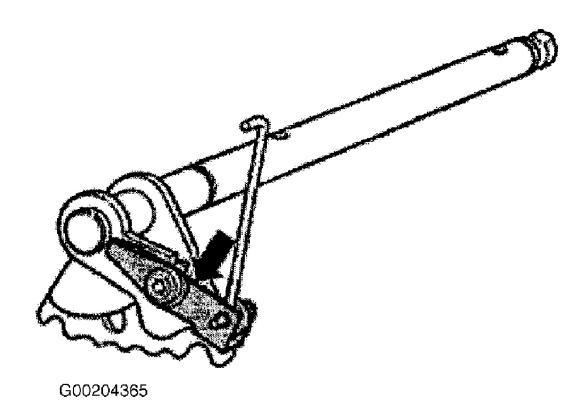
Locating Steel Spring On Selector Shaft Courtesy of VOLKSWAGEN UNITED STATES, INC.
